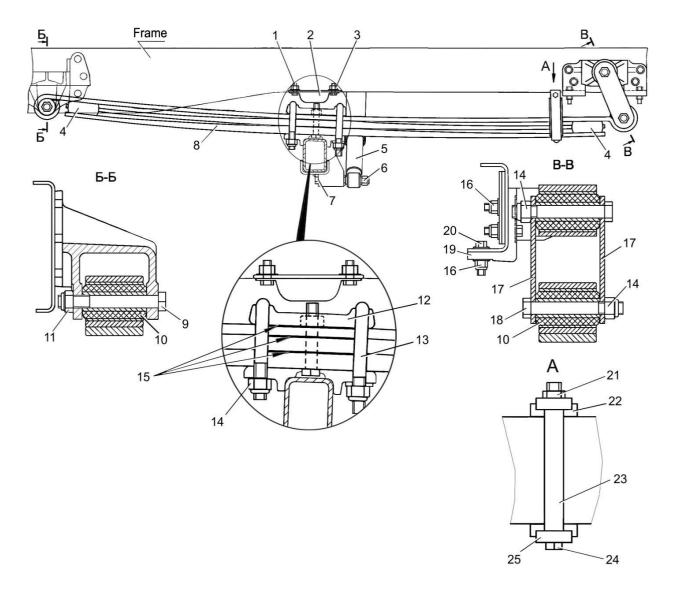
Rear suspension: 1, 7, 9, 18, 20, 24 – bolts; 2 – buffer; 3, 6, 11, 14, 16, 21 – nuts; 4 – pads; 5 – shock absorber; 8 – dual-rate spring; 10 – silent blocks; 12 – clamp plate; 13 – U-bolt; 15 – interleaf spacers; 17 – shackles; 19 - bracket; 22- clamp gasket; 23 - distance bushing; 25 - clamp
